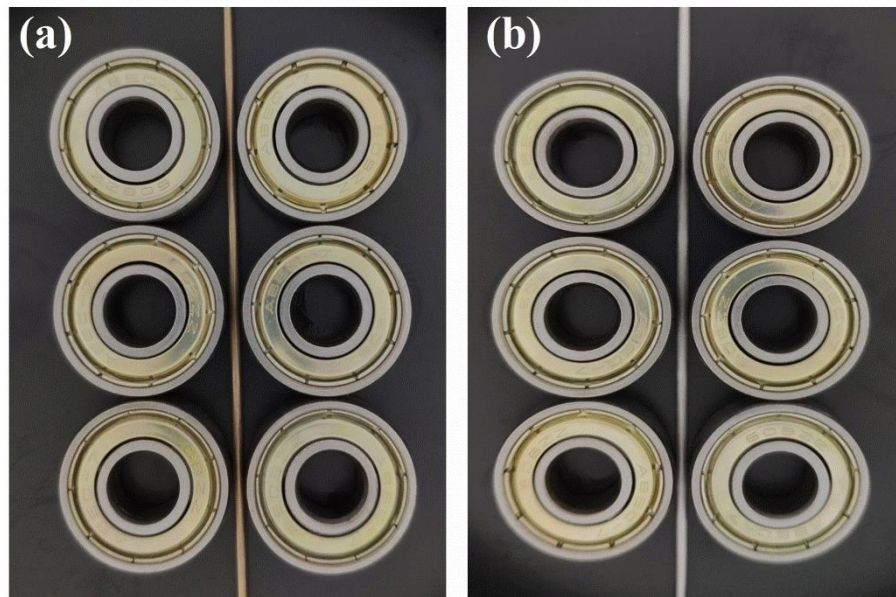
The nondefective and defective copper coated iron wires with bearings around
